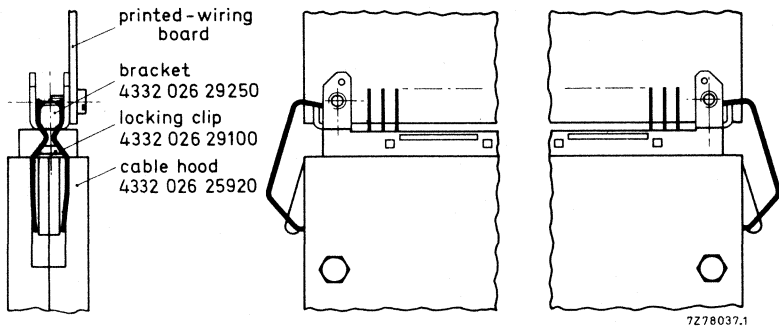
Mounting of a female part to a board with bracket having locking facility.
